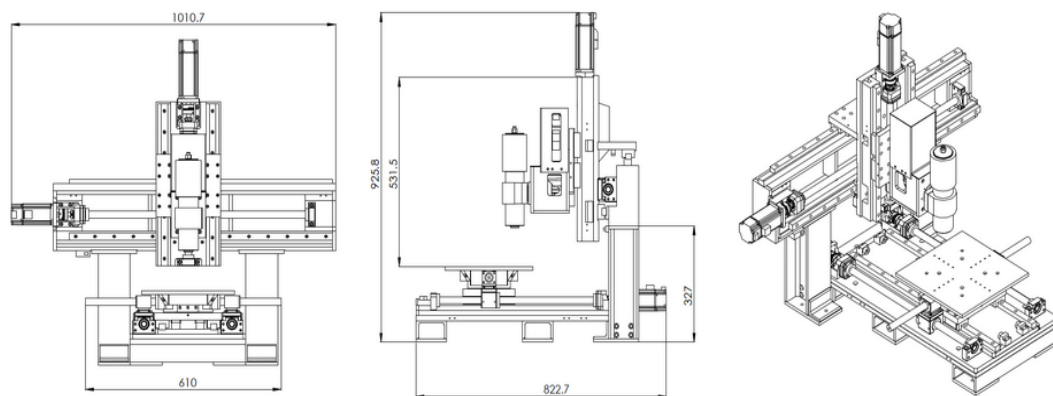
The proposed hybrid parallel-serial five-axis machine tool.
